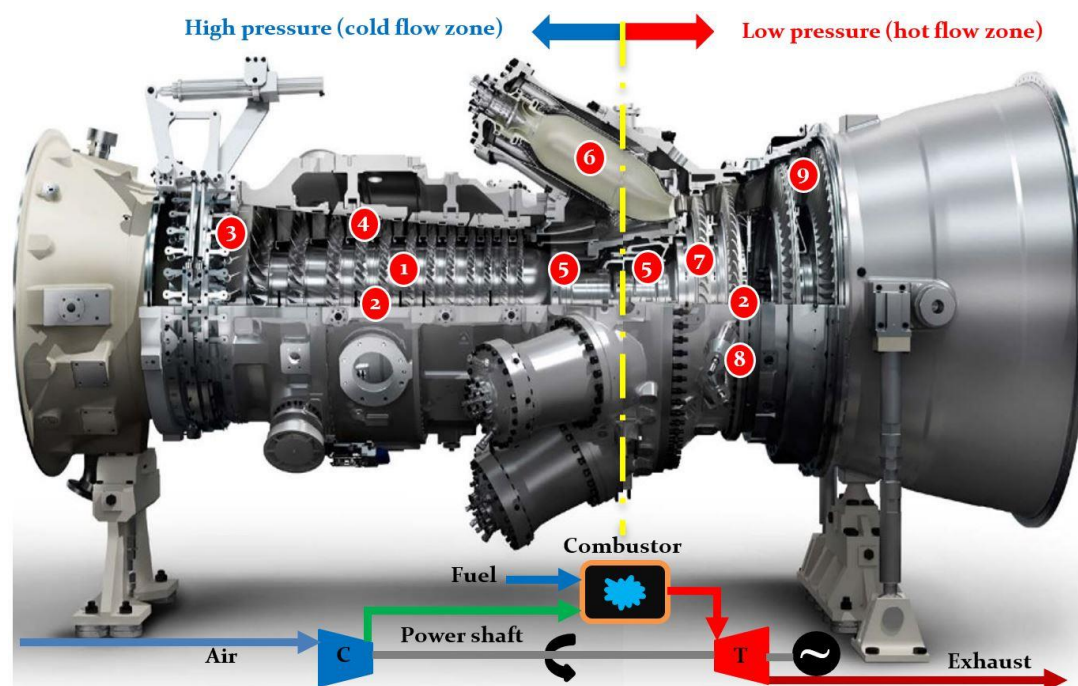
Components of a GT (SGT-750 GT developed by Siemens): 1- compressor rotor, 2- horizontal and vertical split casing, 3- guide vanes, 4- multi-stage compressor, 5- bearing and balancing planes, 6- combustor, 7- multi-stage compressor turbine, 8- online monitoring, 9- multi-stage power turbine. Reproduced from [29].
